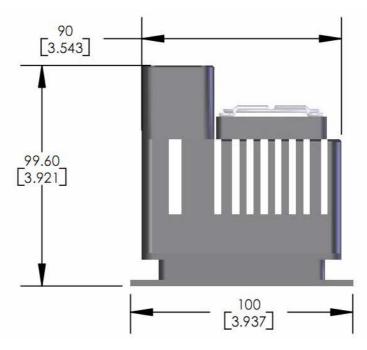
Standard Body (Type A) with Rectangular Flange (Type A) - Side View
